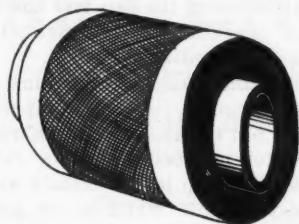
Ring gage with projection at each end to insure that the hole in the gage will not be "bell mouthed."
